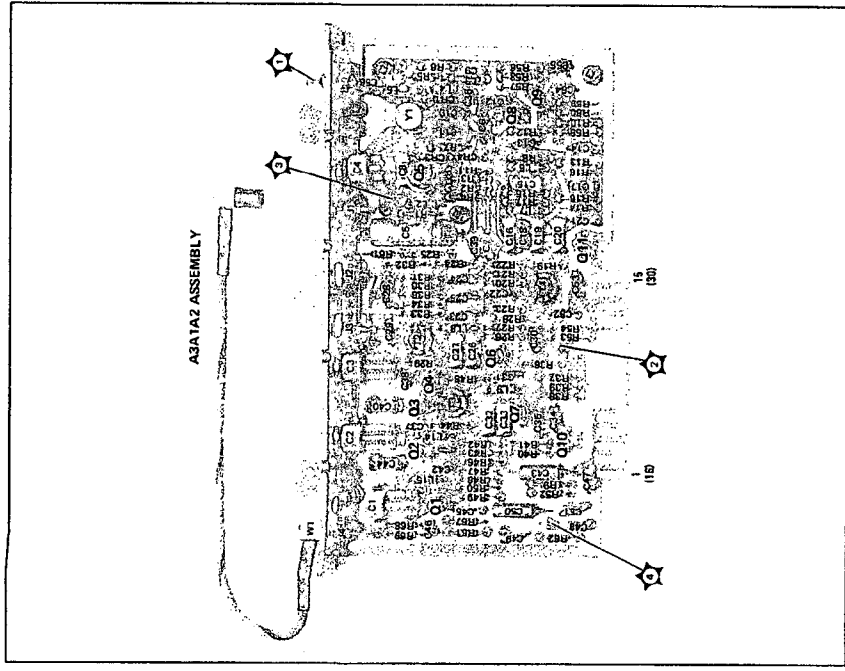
AS31A2 100 MHz VCO Assembly Component and Test Point Locations
